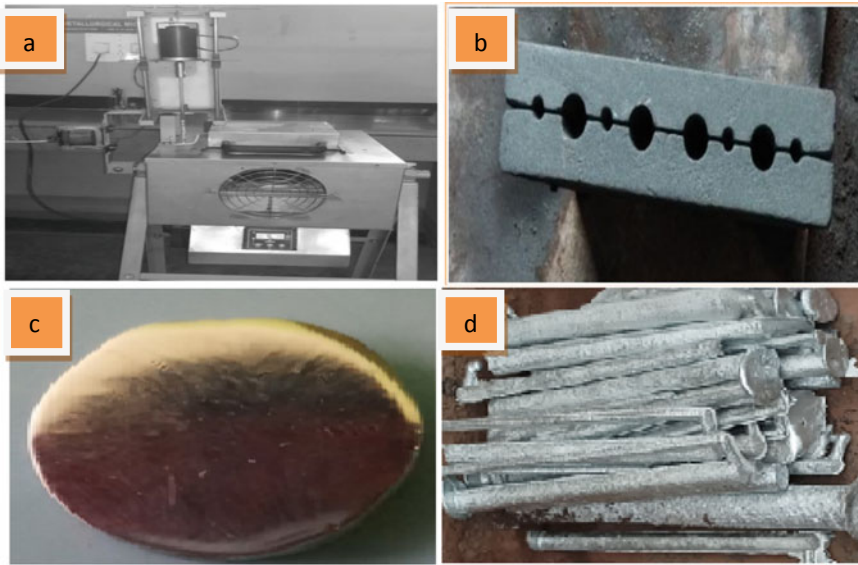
a Electric arc furnace, b casting die, c fabricated specimen for SEM and d fabricated composite samples
